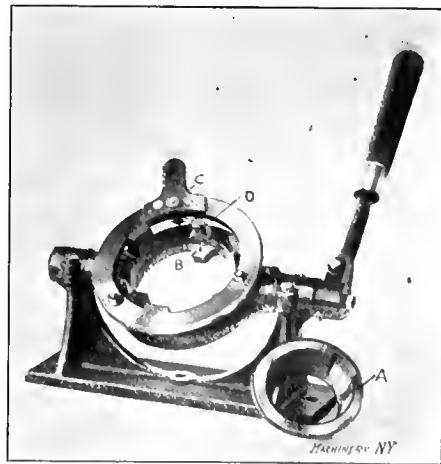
Fixture of which the Casting shown in Fig. 1 forms a Part
